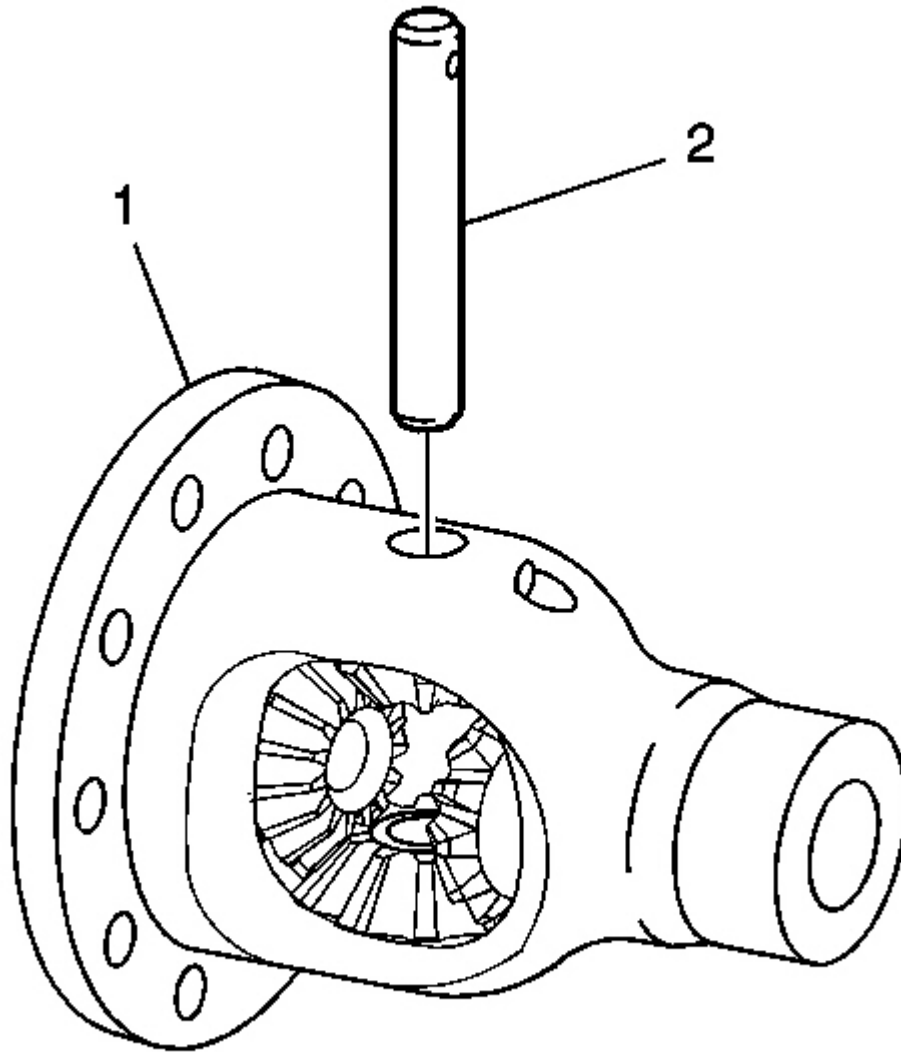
Installing Pinion Shaft Pin & Aligned With The Hole In The Differential Case
